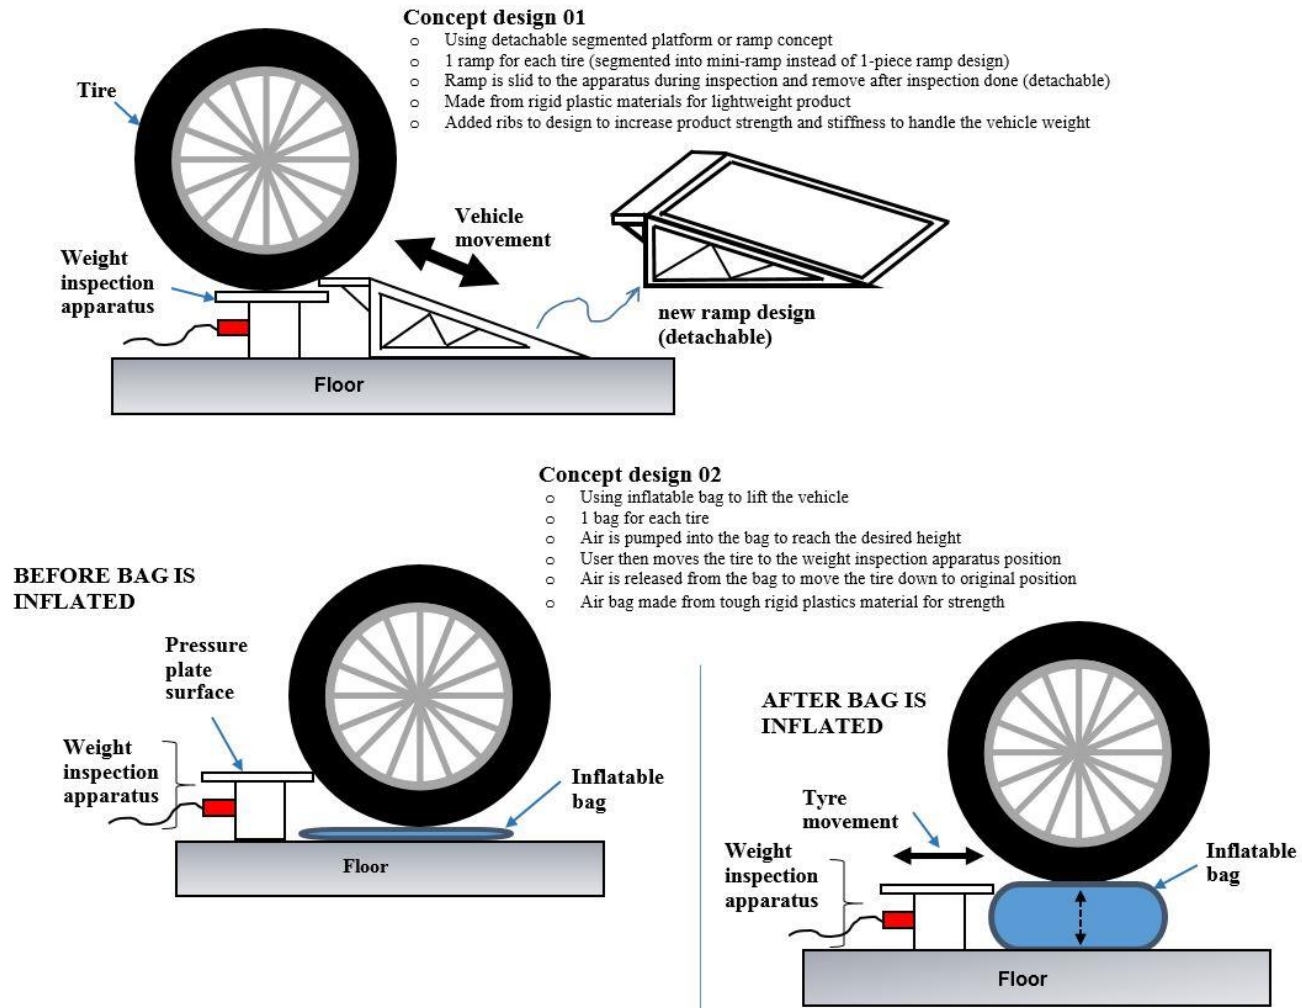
Examples of several new conceptual designs for the FV Malaysia weight inspection fixture
